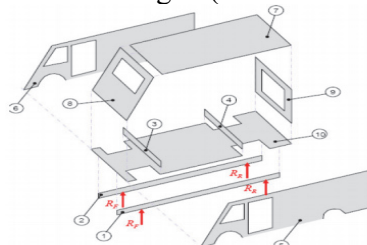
SSS Van structure, where SSS 1-6: carry bending load, SSS 5-10: carry torsion load
